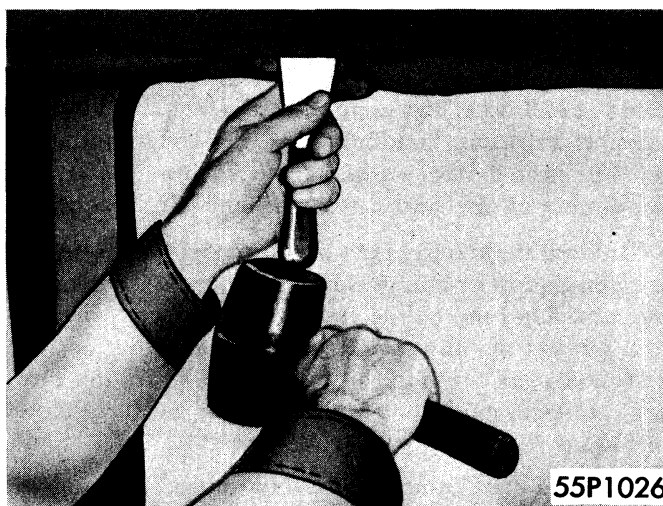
Tucking Headlining Between Retainer and Roof Rail
